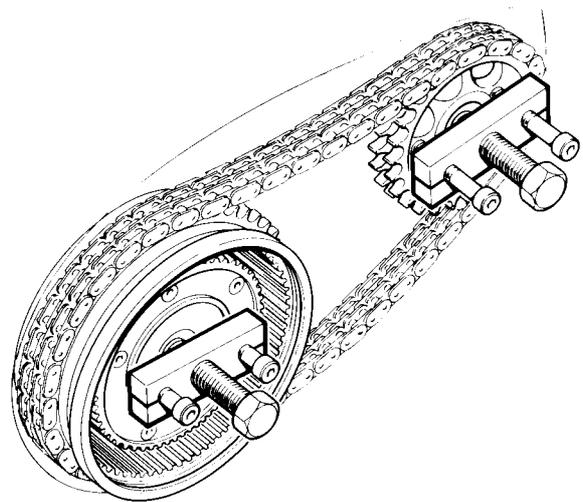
Removing clutch and engine sprockets using the extractor tool
